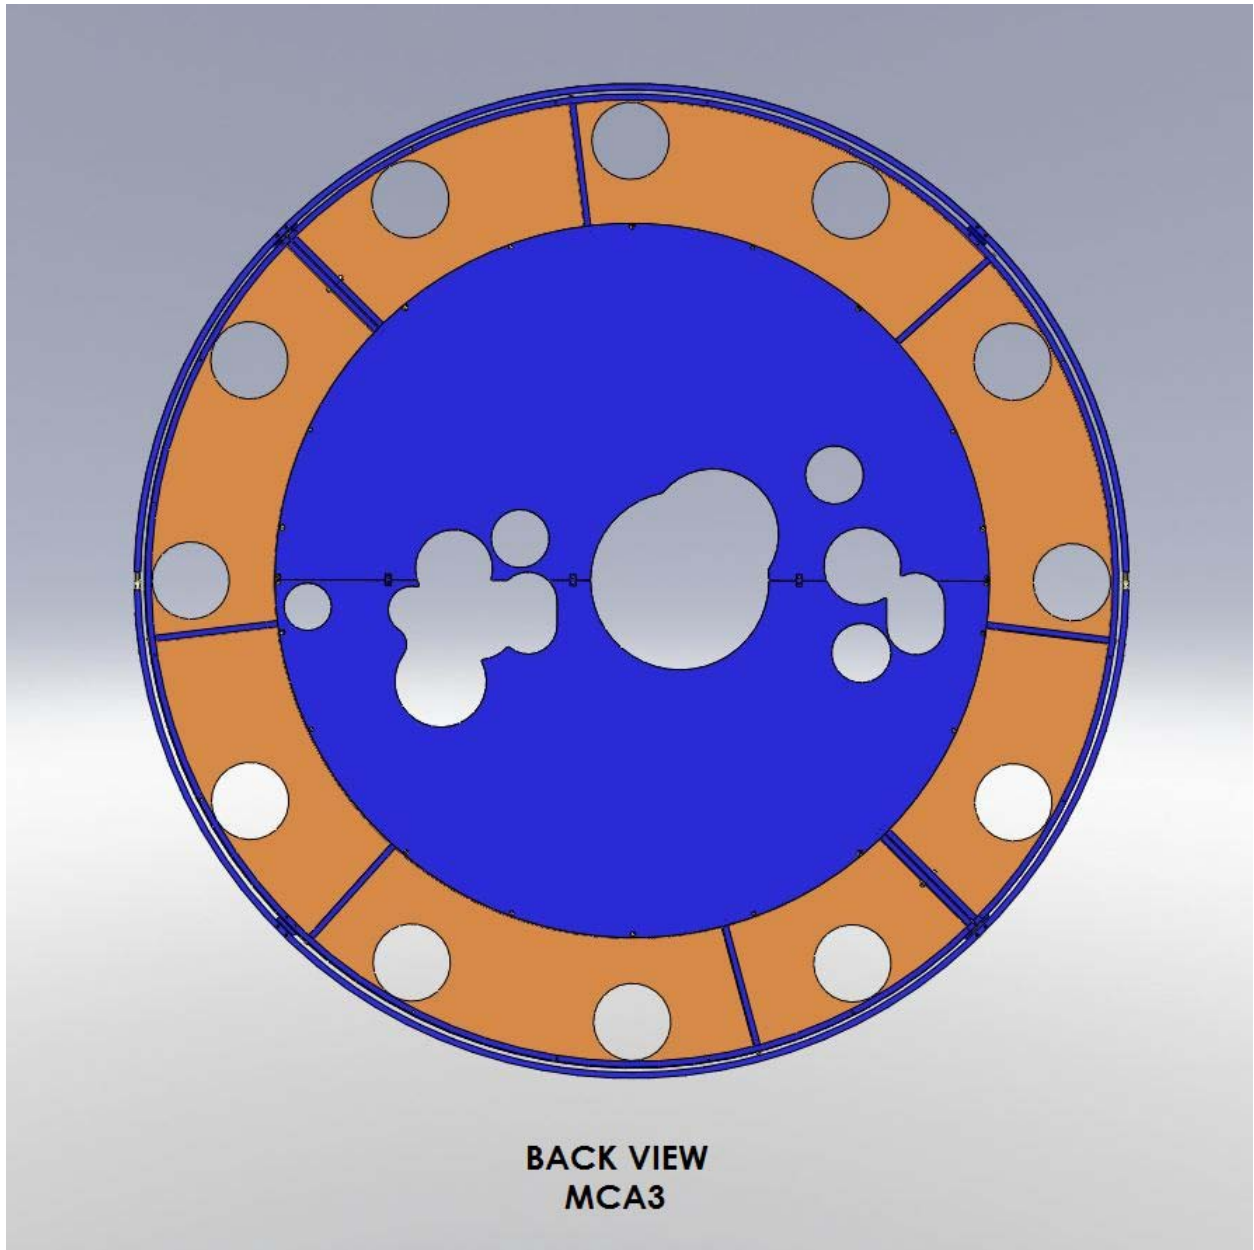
Back View of MCA3 Mode Cleaner Tube Baffle
